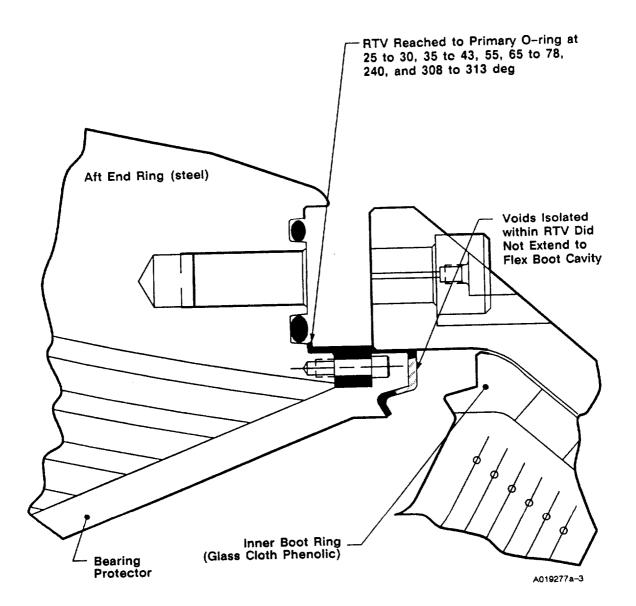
STS-26A—Flex Bearing/Fixed Housing Joint
